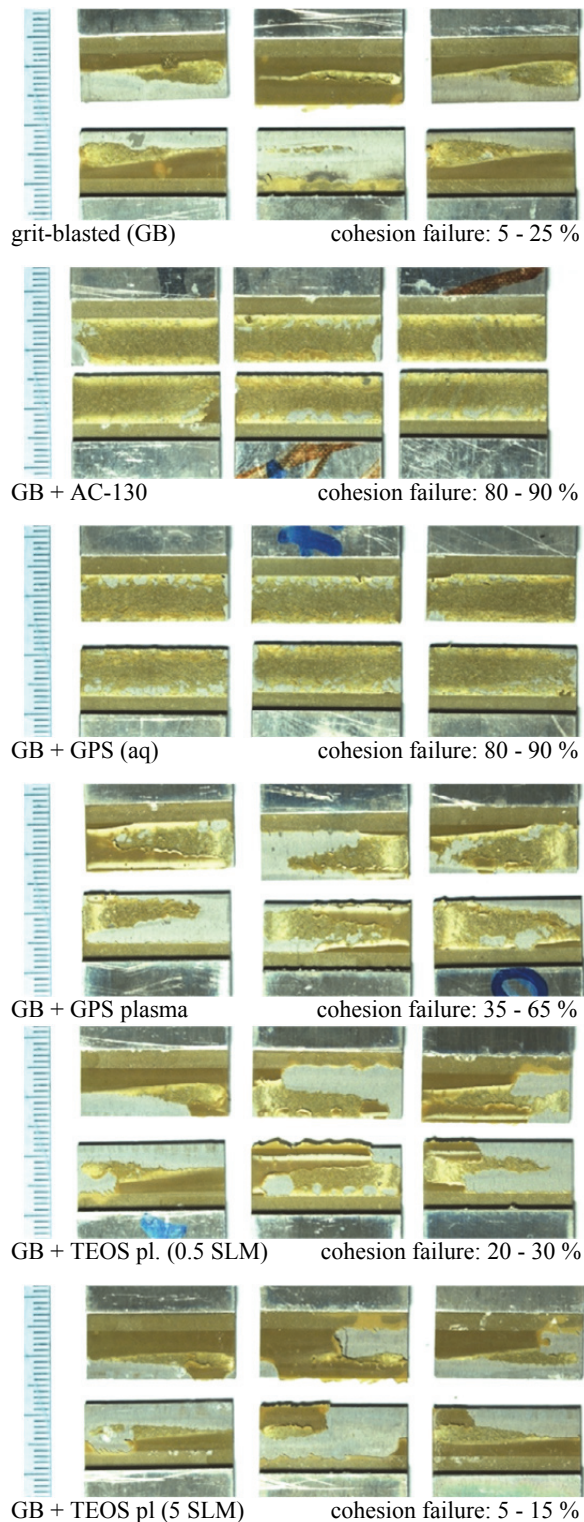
Fracture surfaces of AA 2024 clad joints after dynamic (DI water, 50 °C) and quasi-static (dry) tensile testing
